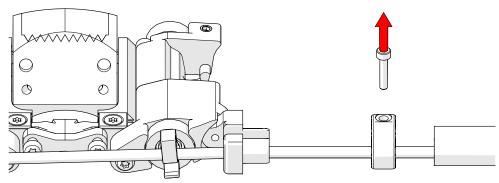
Remove sleeve, sleeve camp and sleeve clamp screw
